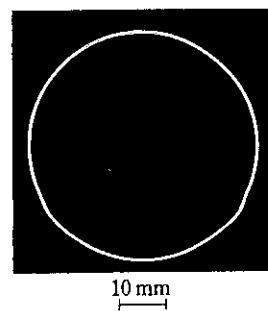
Cross section of ultra thin wall-thickness ERW stainless steel pipe produced by CBR mill (SUS436J1, φ38.1 mm × t0.6 mm)
